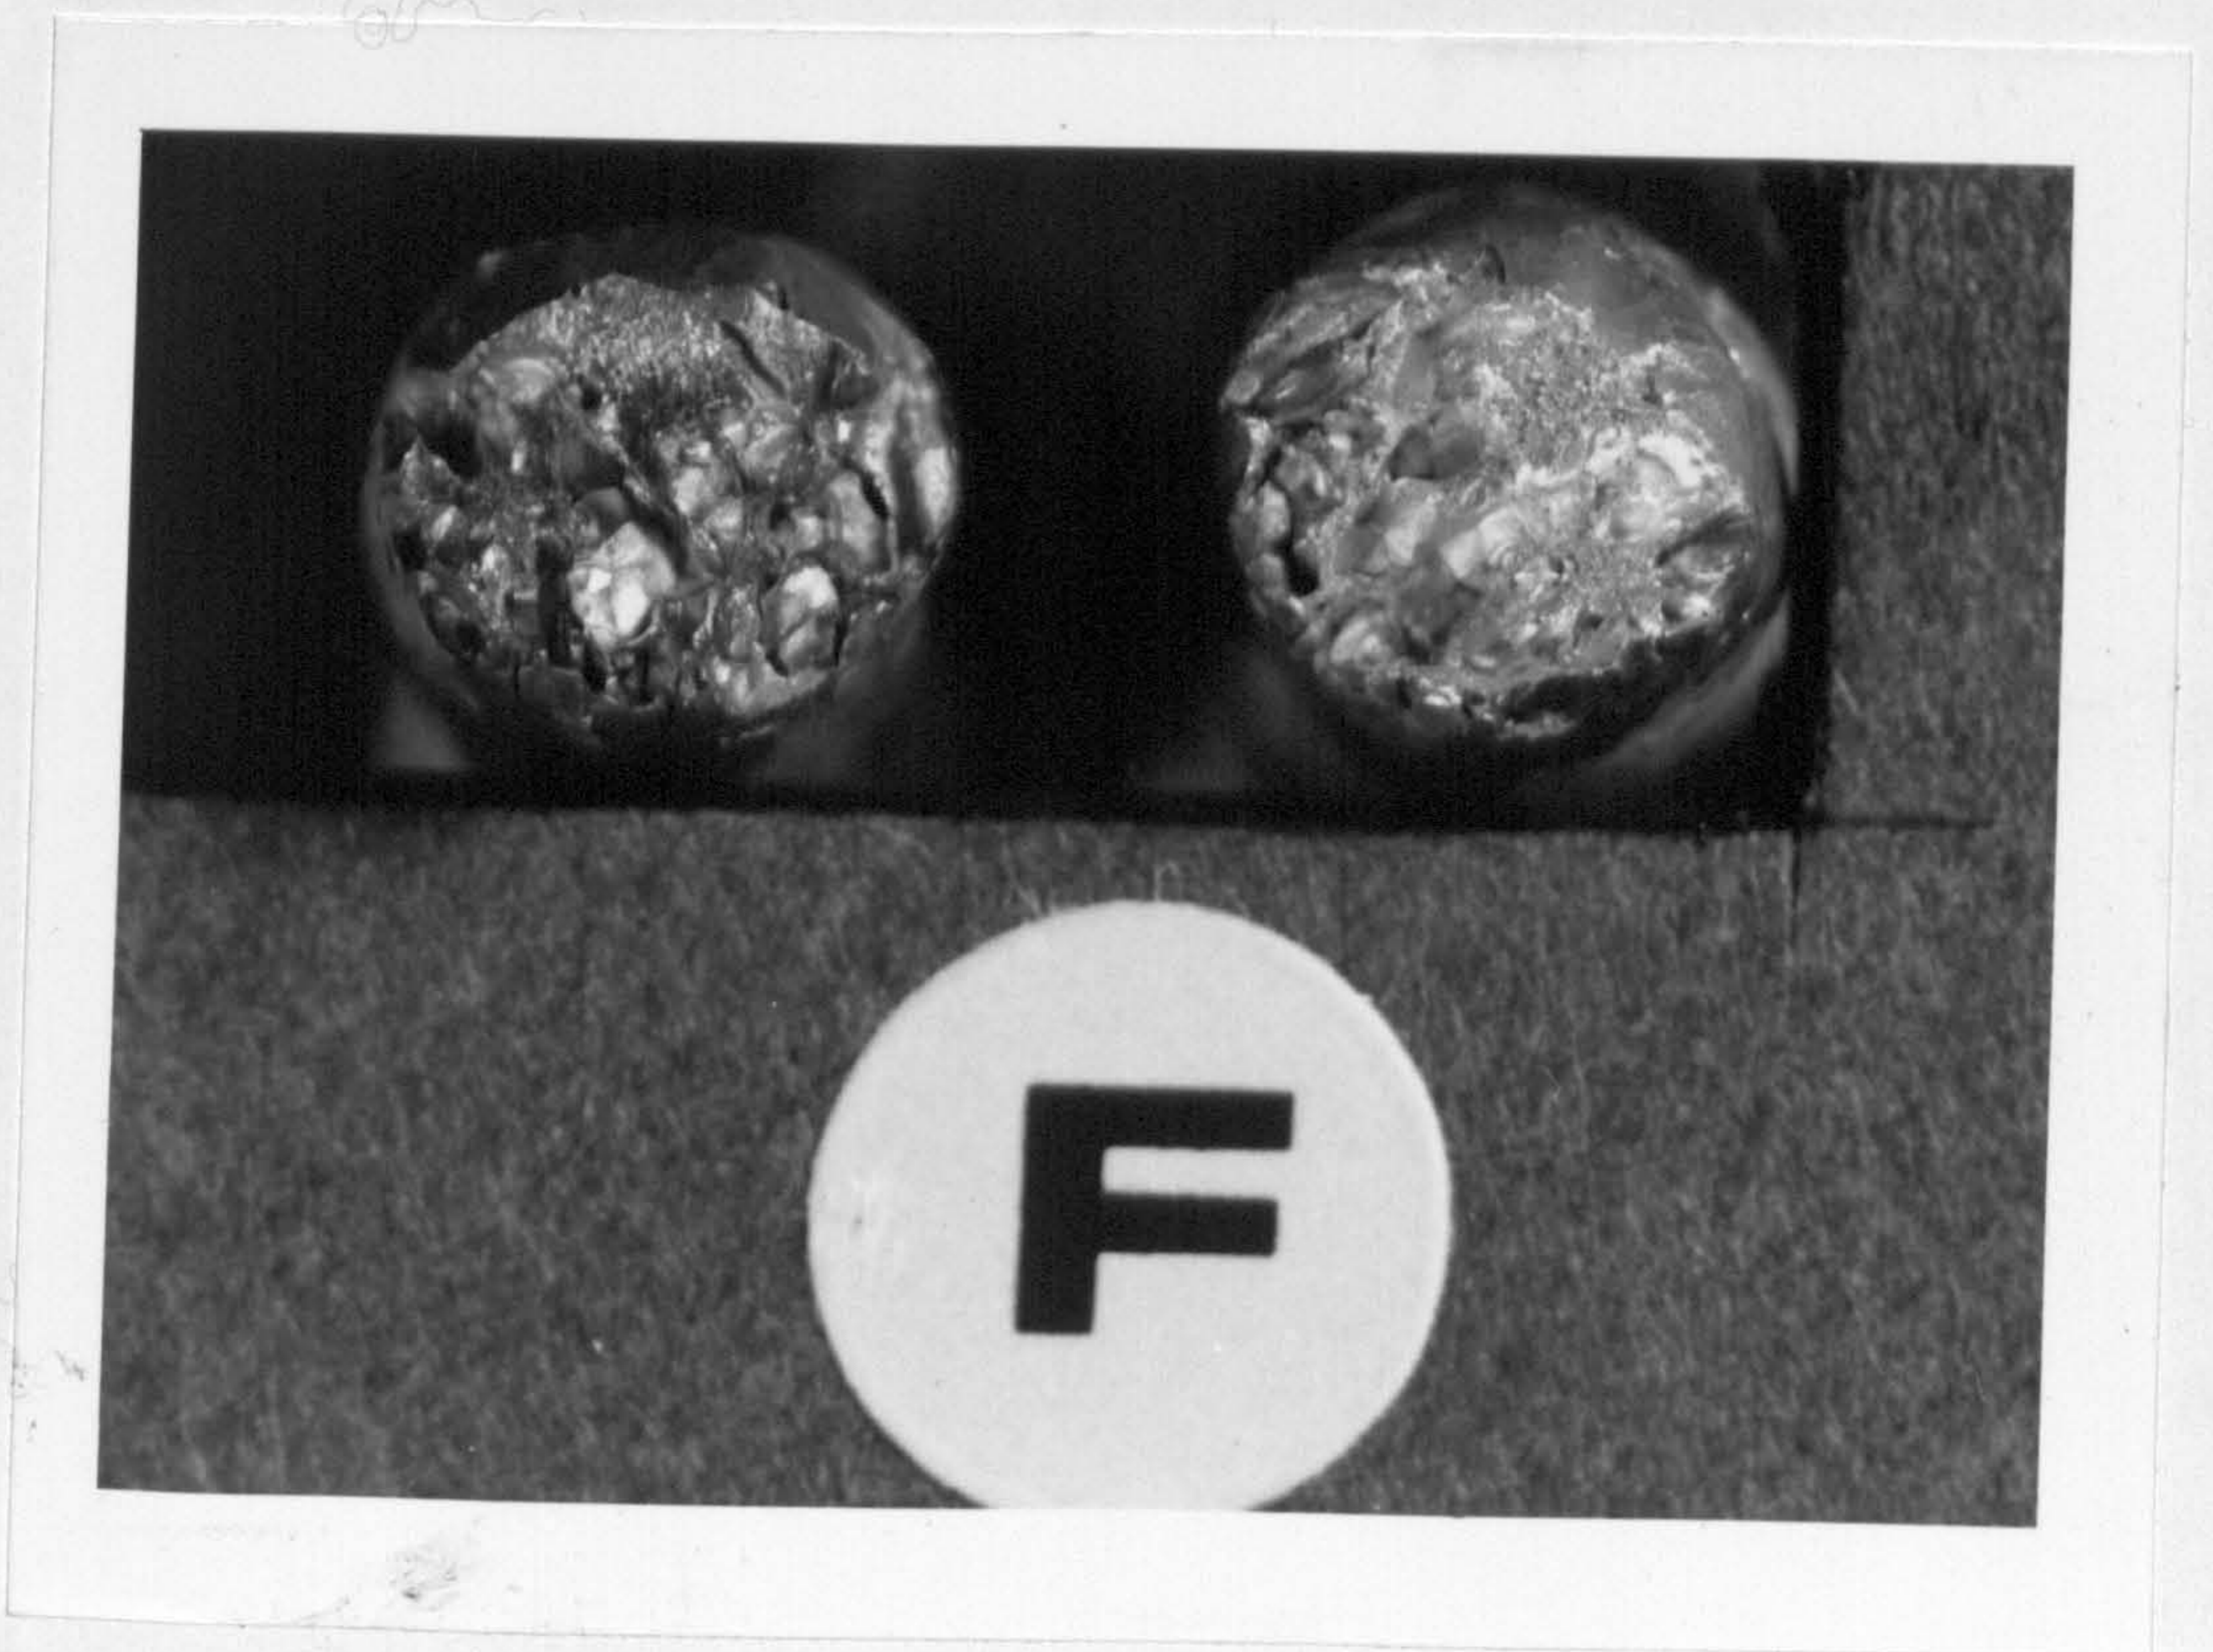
Fracture surfaces for specimen (F), Fig.3.24, tested at 150°C. (Batch-(M) Copper).
